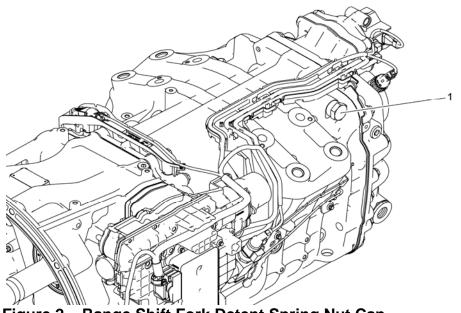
Range Shift Fork Detent Spring Nut Cap
